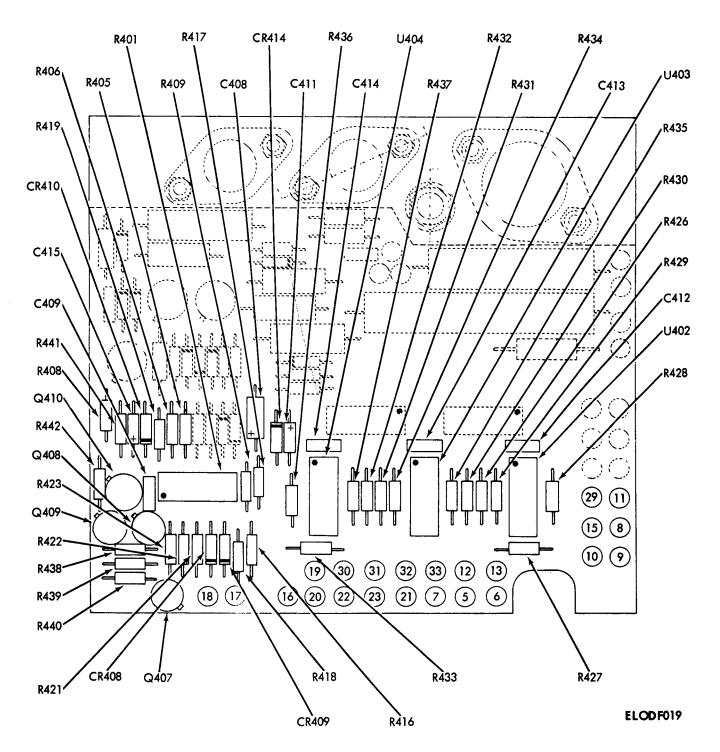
(2). De voltage regulator and data drive printed circuit board assembly (A4) (sheet 2 of 2).
